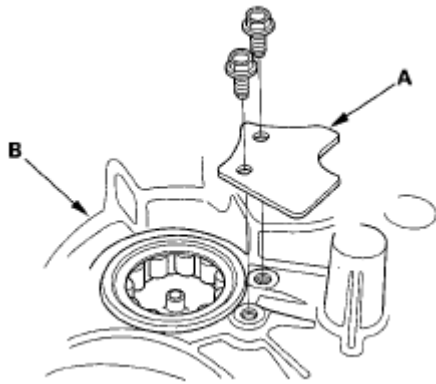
Identifying Bearing Set Plate And Clutch Housing
